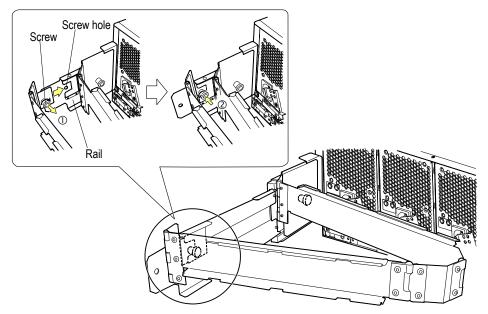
Installing the Cable Routing Bar Installing Part (Rev.C or later)
